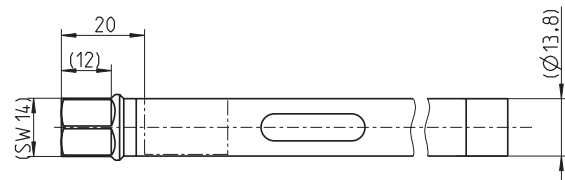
Mounting wrench $\varnothing 13,8$ /SW14 Type 1300A67 for mounting bore $\varnothing 14$ mm
